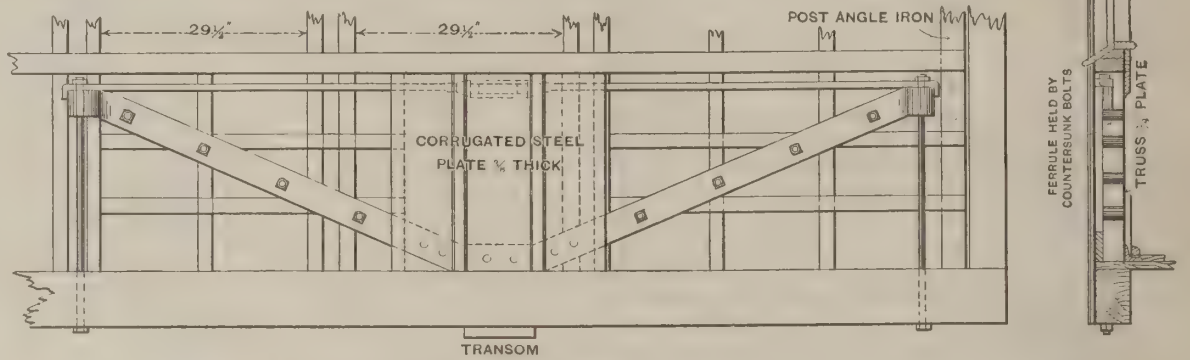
CANTILEVER SIDE TRUSS IN CONNECTION WITH THE CHALLENGER TRUSS.
